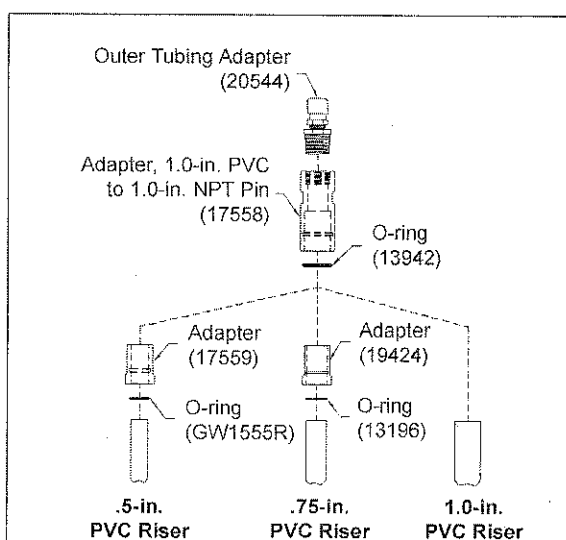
Adapters for attaching the outer tube to .5-, .75-, and 1.0-inch PVC riser pipe.
